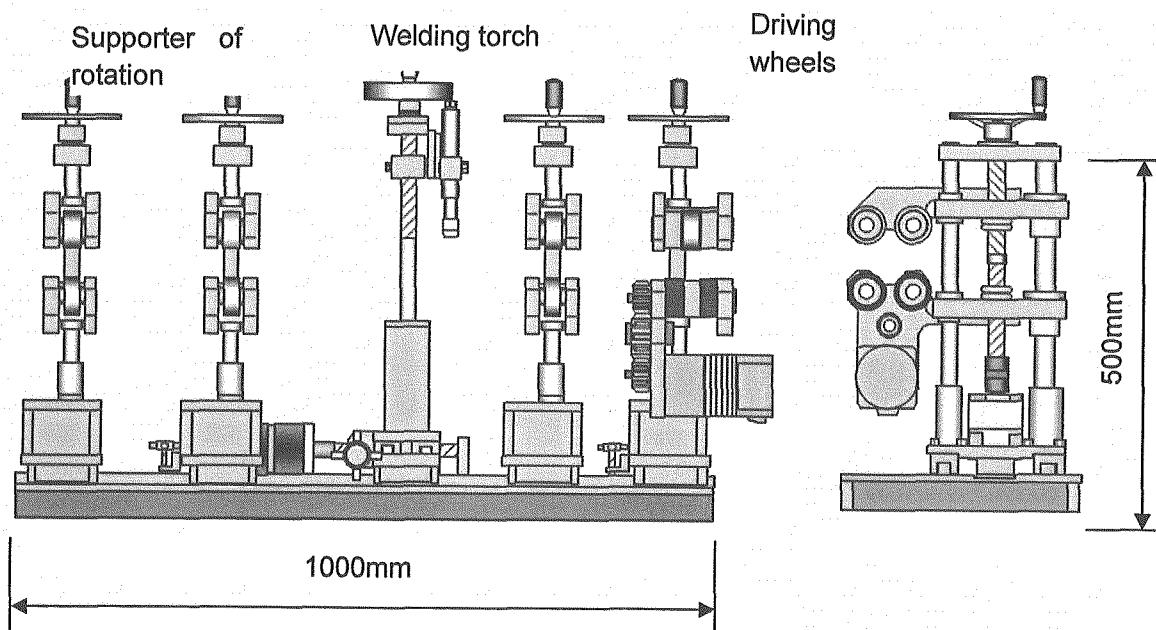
Schematic drawing of capsule welding apparatus
